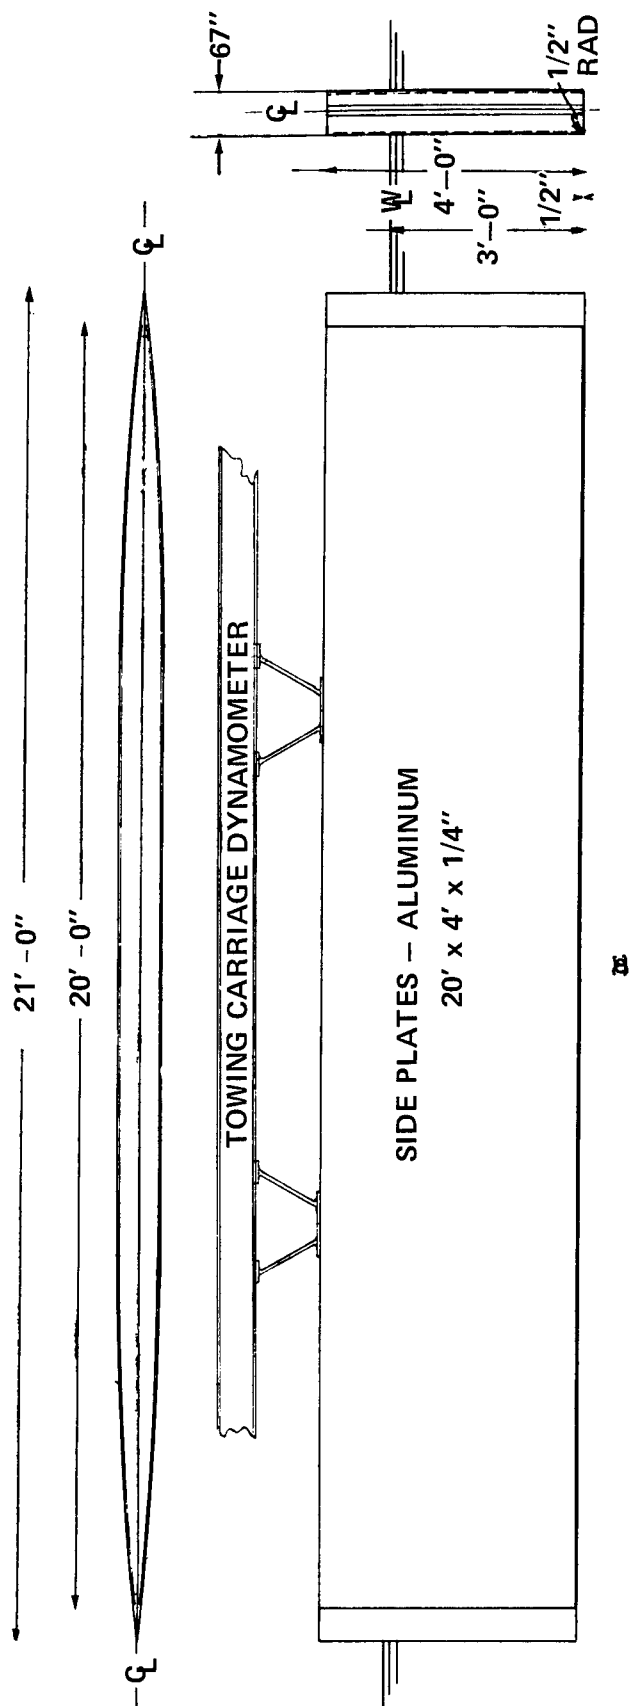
Details of NSRDC Friction Plane and Connection to Towing Carriage
